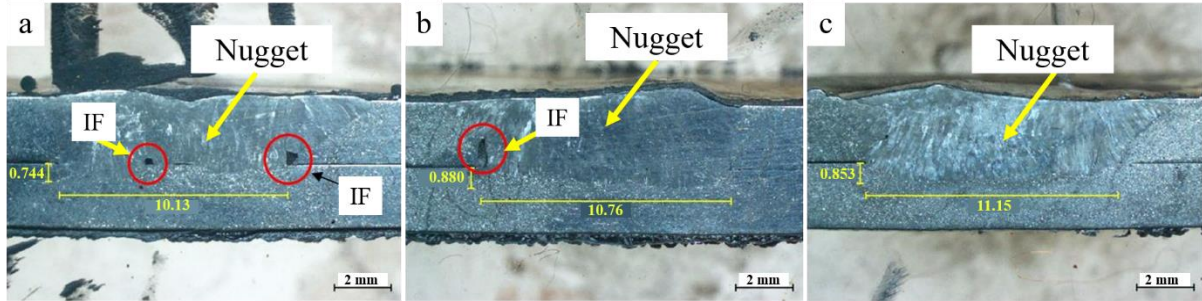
Nugget cross section macro photo of different welding currents: (a). 80 A, (b). 100 A and (c). 120 A (Dimensions in mm).
